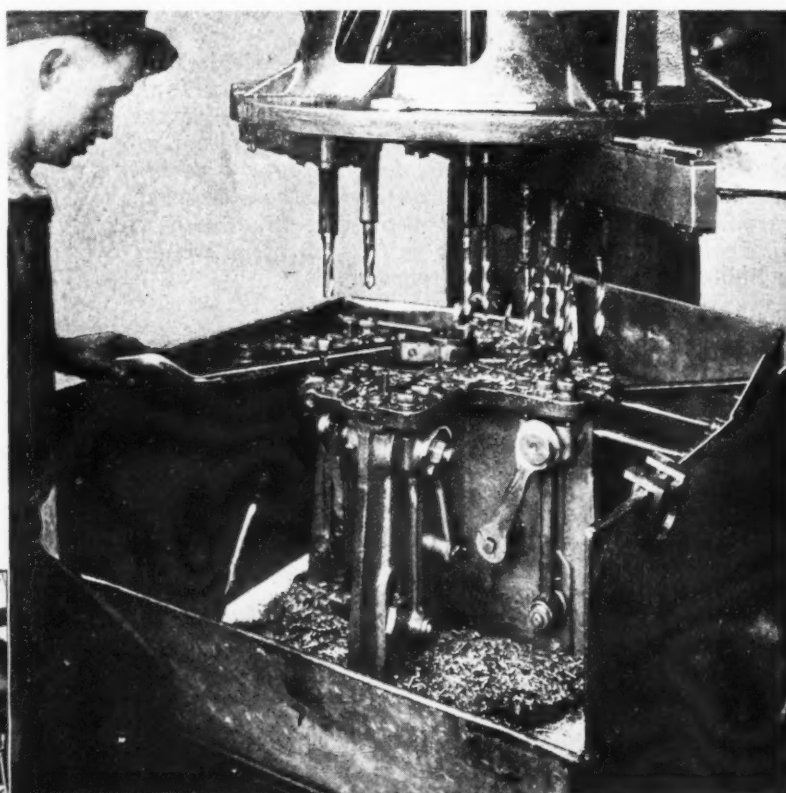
Fixture for drilling holes for connecting-rod bolts in crankshaft end of connecting-rods. This fixture accommodates eight rods at one time. Six rods are machined at once
